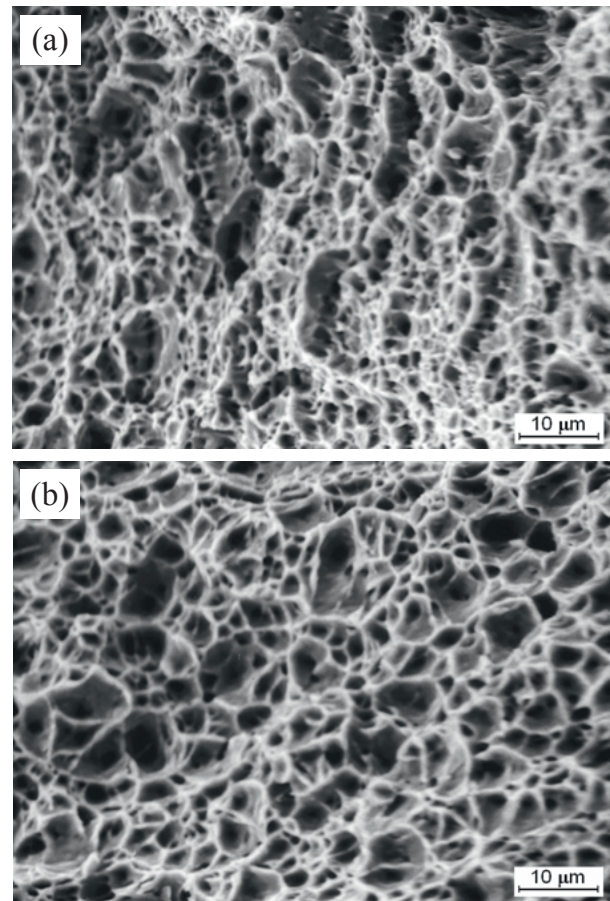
SEM fractographs showing transgranular fracture in tubeplate forging specimens tested at (a) 573 and (b) 873 K. A very few chisel tip appearance can be seen in specimen tested at 573 K in (a).
